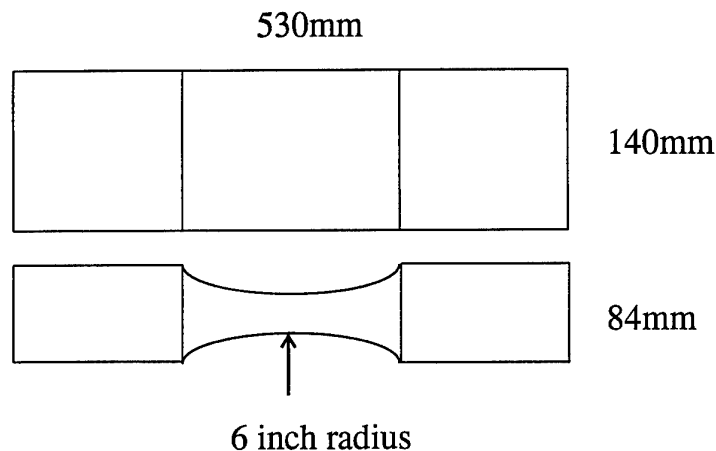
Test coupon dimensions - material aluminium 7050-T7451 plate.
